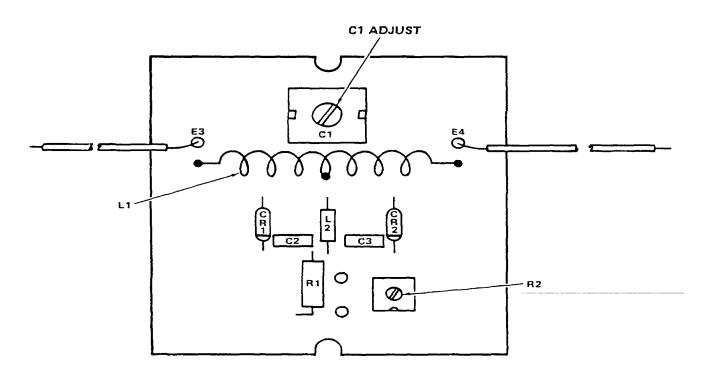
Field Detector, 2A1 Circuit Card Assembly Component Location
